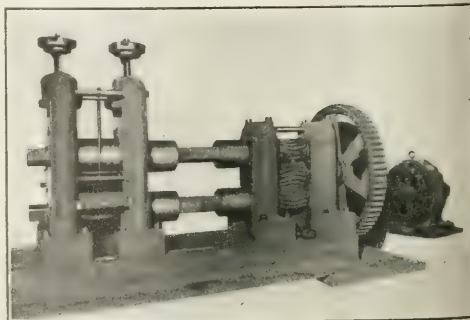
MOTOR-DRIVEN COLD-ROLL MILL
